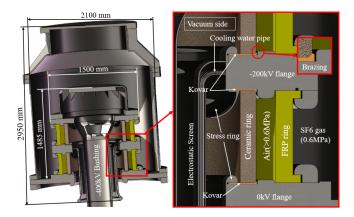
Cross sectional view of CRAFT NNBI HV bushing.
